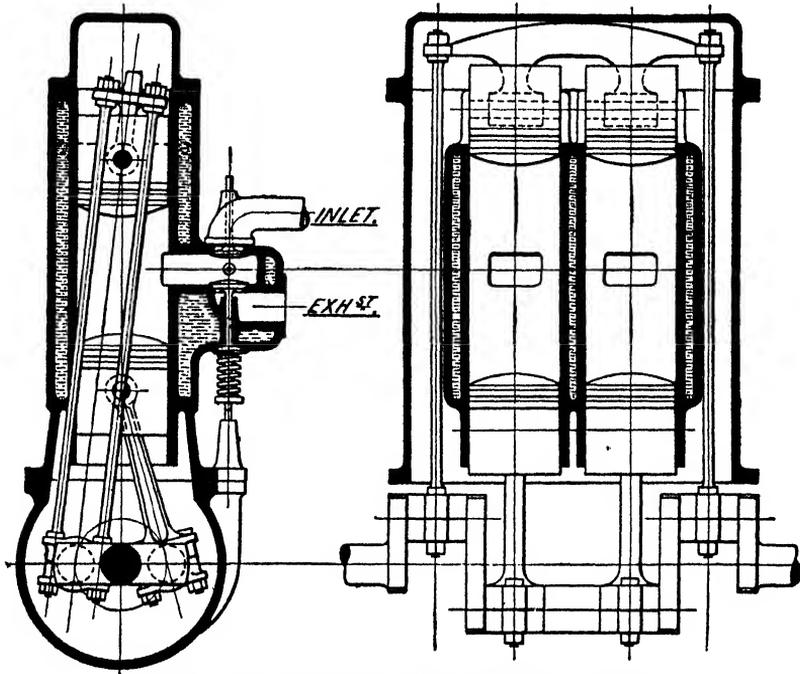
Gobron-Brillié Motor-car Oechelhauser-type Engine
